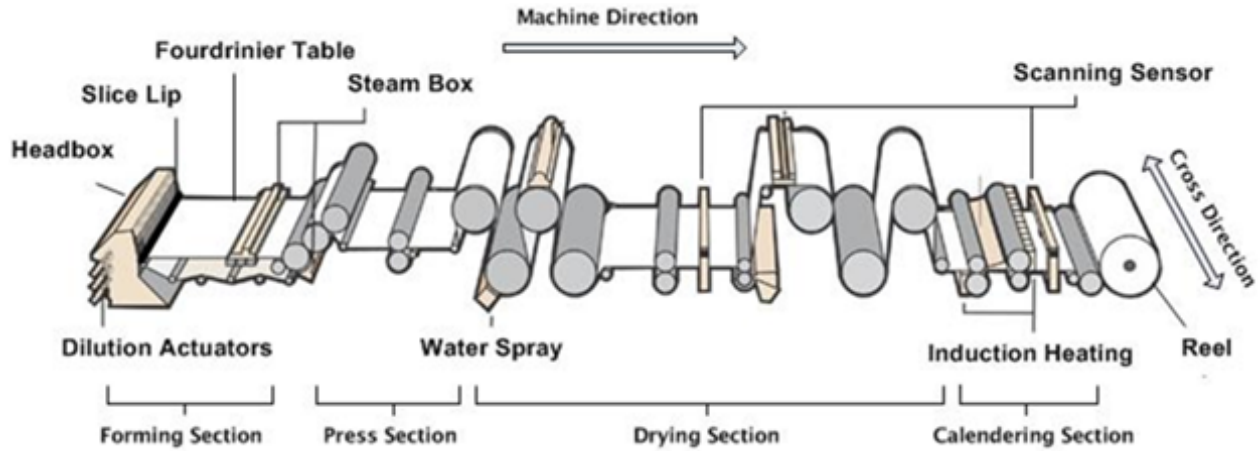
Schematic of a Fourdrinier paper machine [16]
